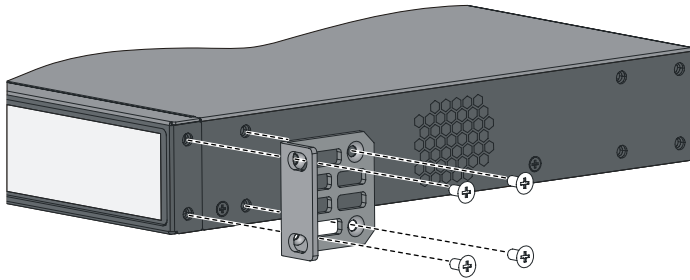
Install a four-holed mounting bracket on the chassis (center mounting)
